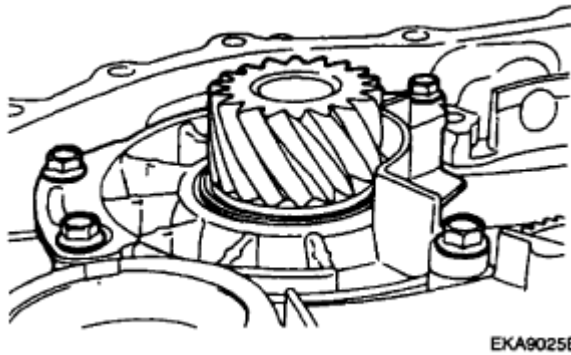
Locating O-Rings Of Low & Reverse Brake
